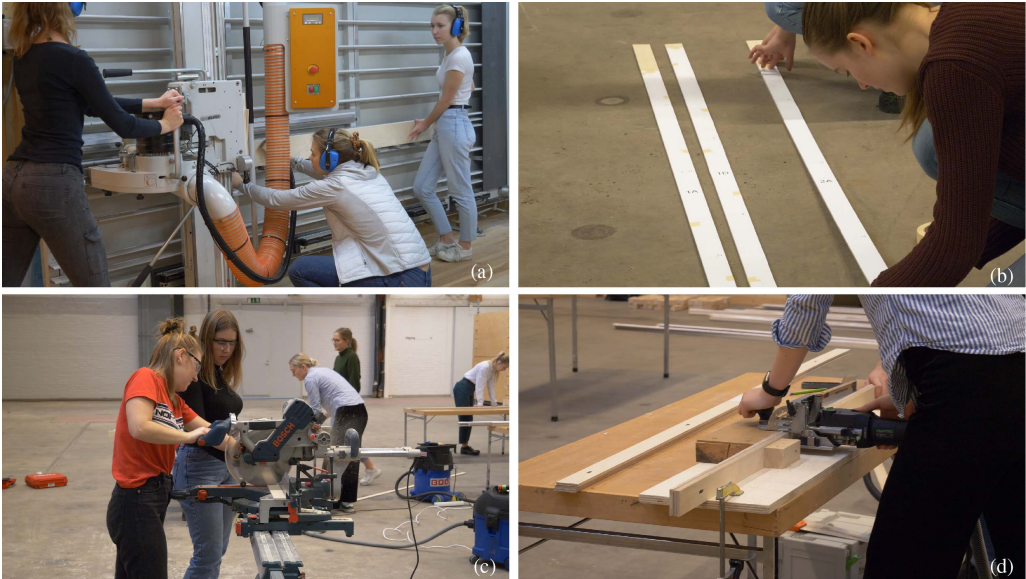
Making the laths from 6mm birch plywood board. (a) The boards were cut in the wood workshop using a wall-mounted saw to cut the board into straight laths of 50 mm width. (b) Paper templates were printed in scale 1:1 and mounted on the cut laths. With the templates, the groups responsible could use the markings for cutting the laths to correct lengths (c) and making the slots and drilling the holes for connections (d).
